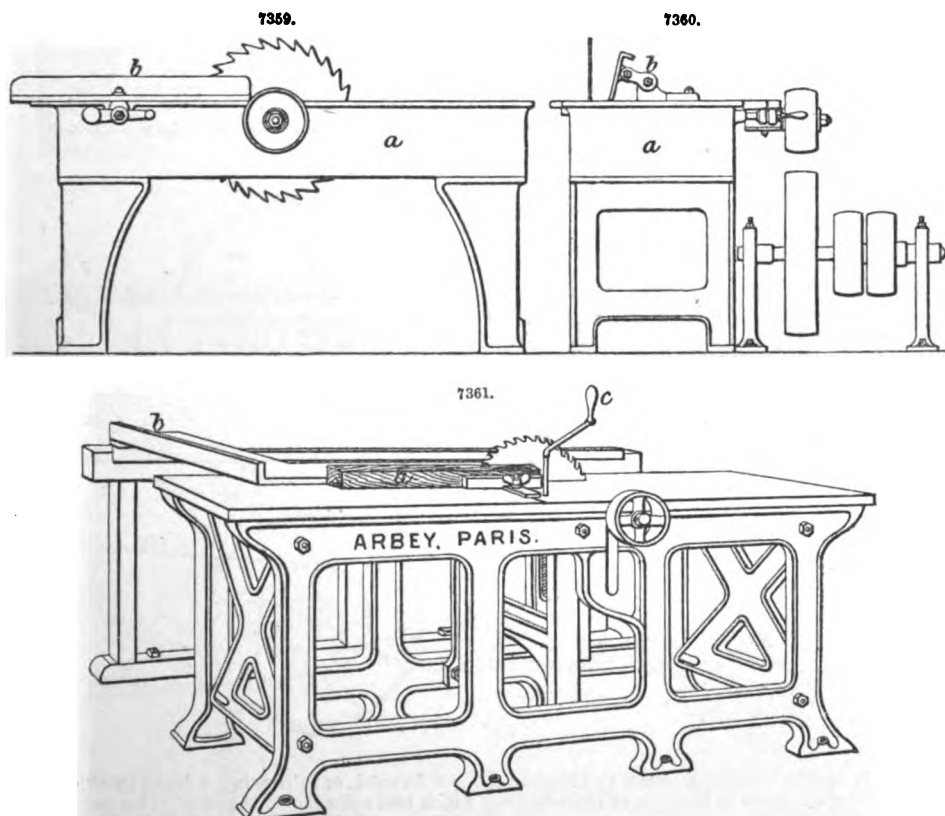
is a saw-bench arranged for both slitting and cross cutting; the gauge *a* is used in slitting, and can be removed while the traversing table is used for cross cutting. The saw with the mandrel and pulley is raised or lowered by means of a sliding frame *d*, operated by the winch *c*, so that the saw may be projected through the top of the bench to any height required, and within its capacity. This arrangement is used for cutting grooves or rebates, and in any case where the saw is to cut to a specific depth.
